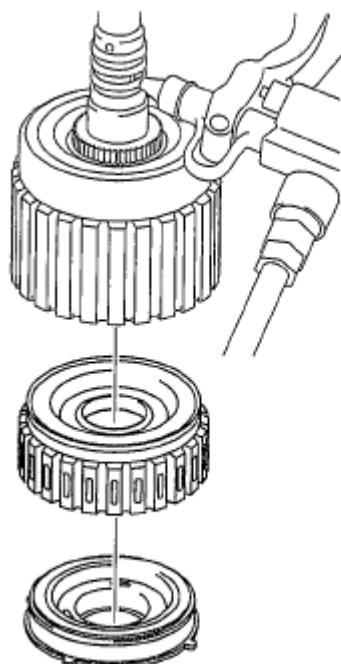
Identifying C4 Clutch Seal Plate And Piston Return Spring
